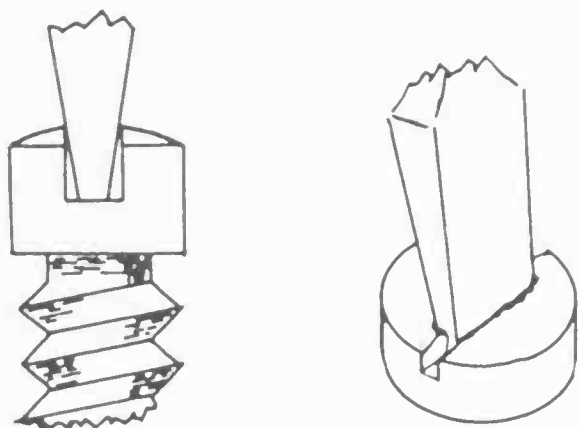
The double-wedge-type screwdriver is not suited for gun repair work, since the blade will transmit its torque only to the top of the screw slot.
